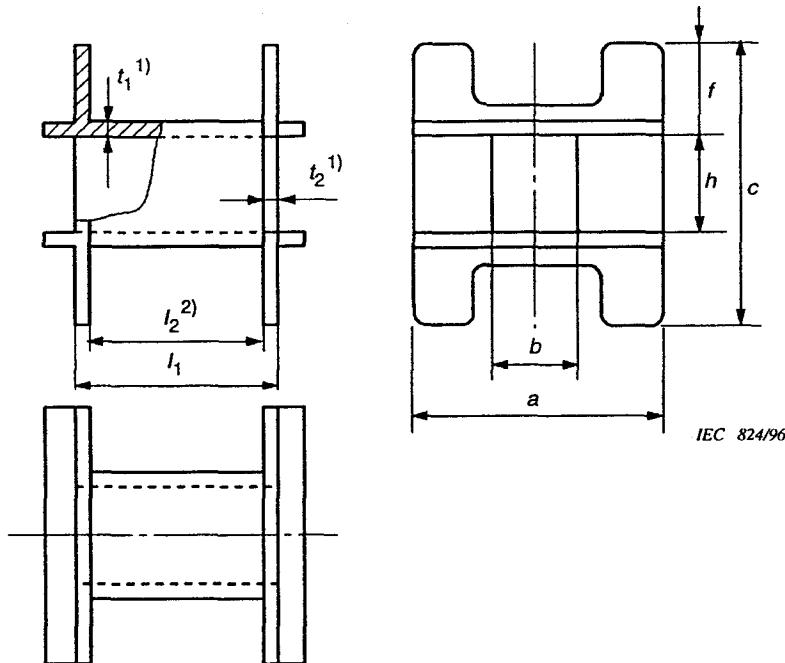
YM 1 coil formers for bracket mounting, standard version
